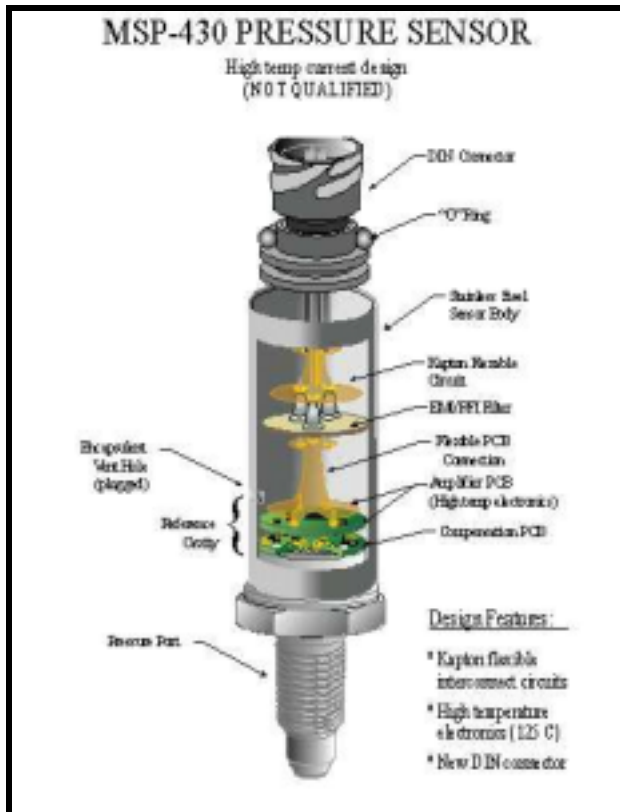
High-pressure Fuel Sensor (Cutaway View)
